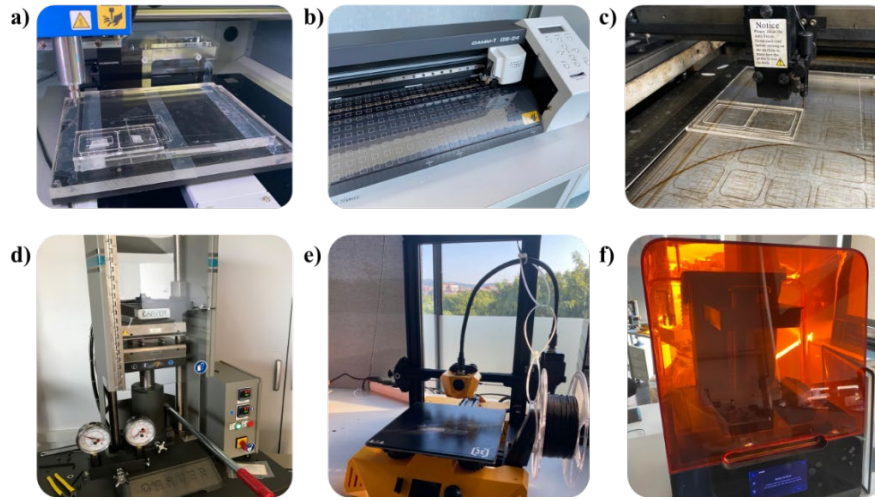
| Rapid prototyping techniques: a) milling technique, b) blade cutting, c) laser cutting, d) hot-press embossing, and 3D printing e) fused deposition f) stereolithography.
